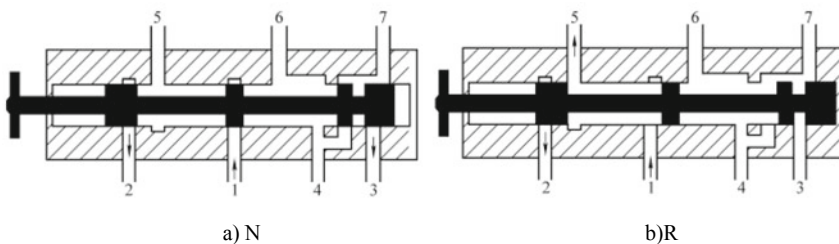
Structure of manual valve. 1—Oil inlet of main control oil pressure, 2, 3—drainage port, 4—oil outlet in gear, 2, 5—oil outlet in gear R, 6—oil outlet in forward gear, 7—oil outlet in gear L
